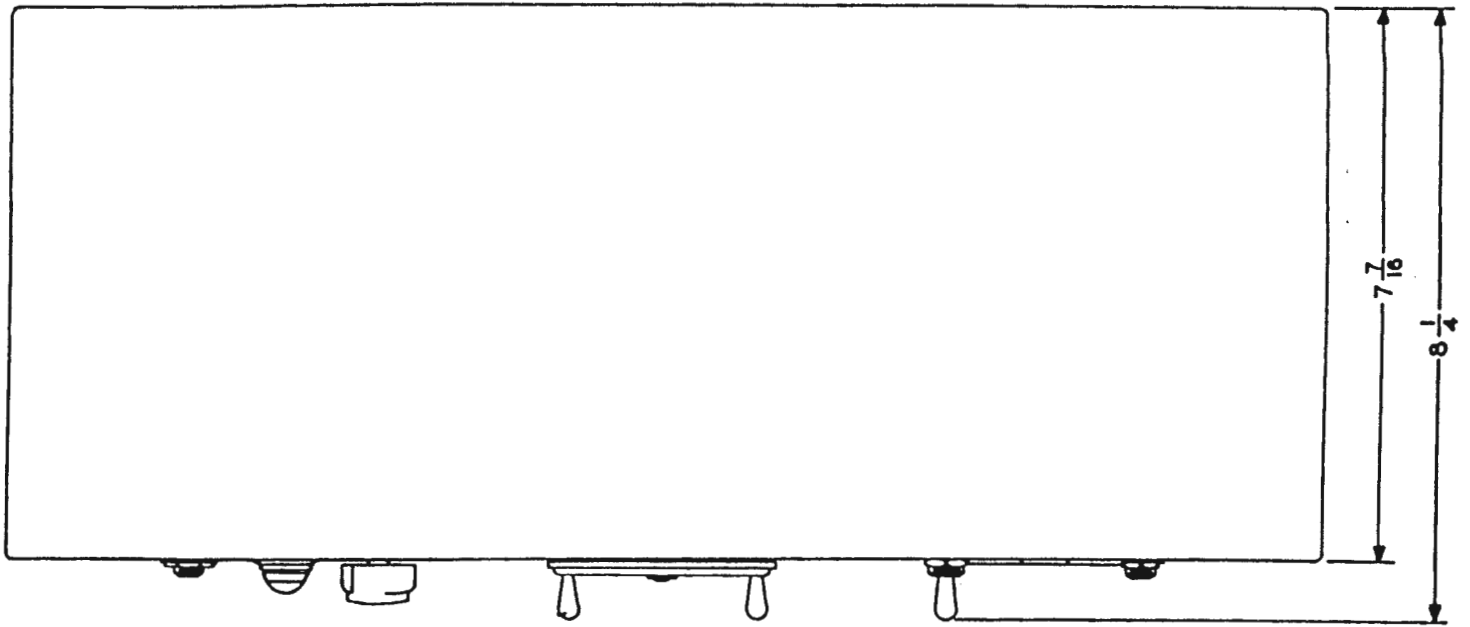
Type 30K Transmitter Outline and Mounting Dimensions
